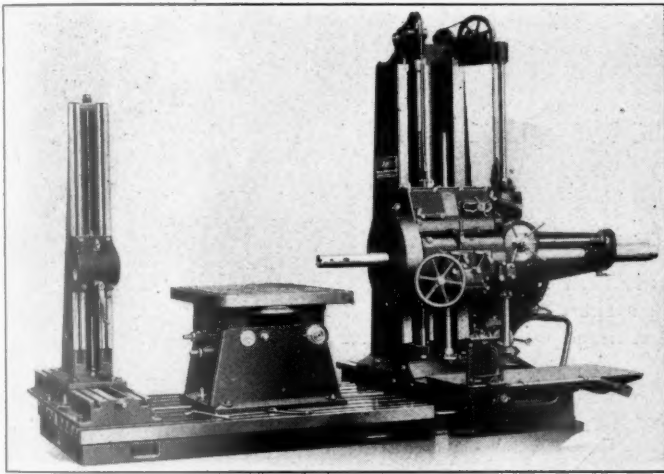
Front View of Machine Showing Large Face Plate, Standard Spindle, Bed Plate and Outer Support
